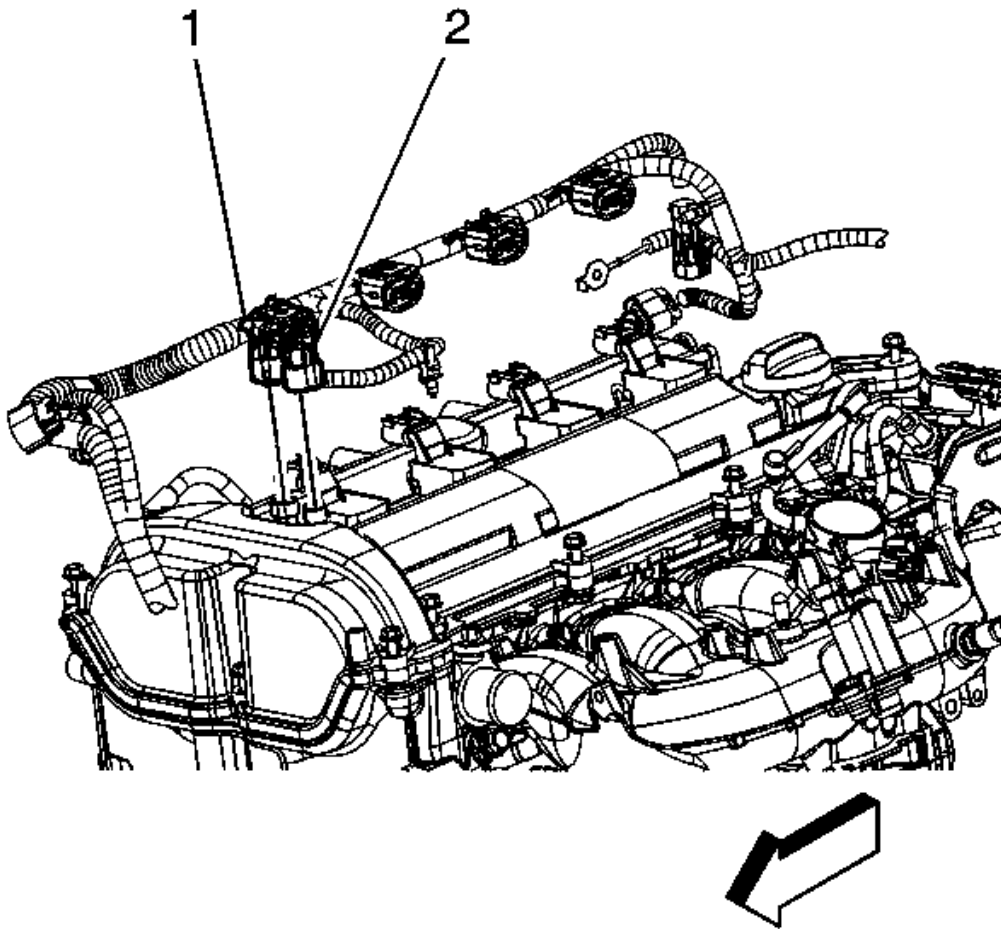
Identifying Intake & Exhaust CMP Actuator Solenoid Valve Connectors
